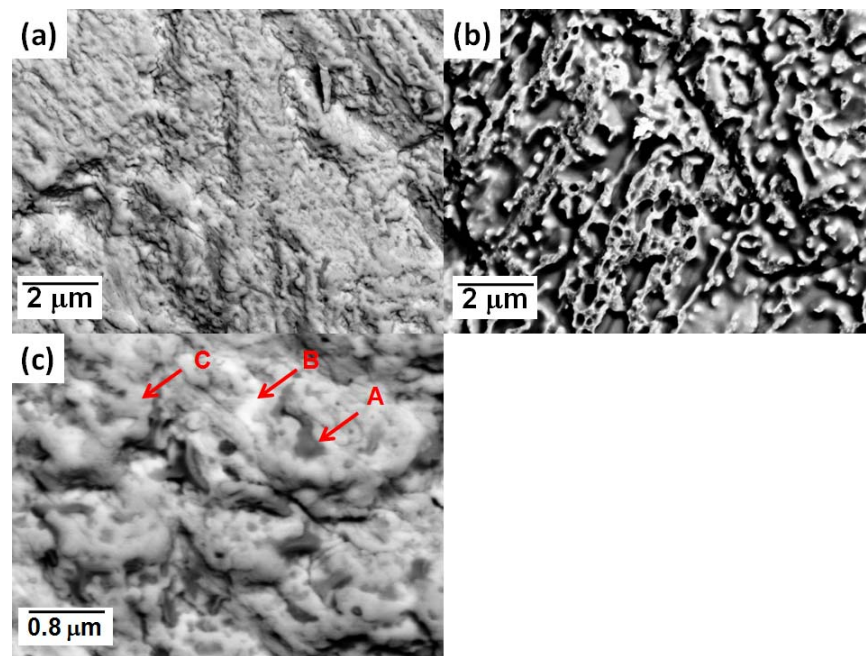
Fracture surface of a joint processed at 300°C. All images are taken by back-scattered electron detector. (a) Pt-BMG solder and (b) copper substrate. (c) higher magnification image of Pt-BMG surface showing compositional contrast.
